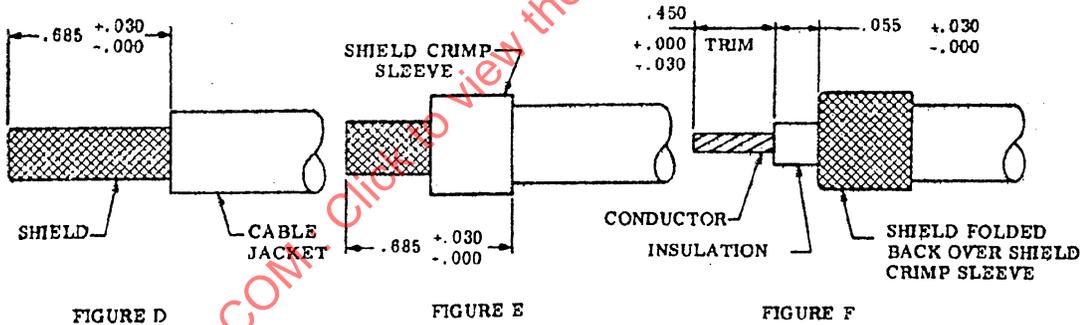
ASSEMBLY PROCEDURE. - CONTINUED
